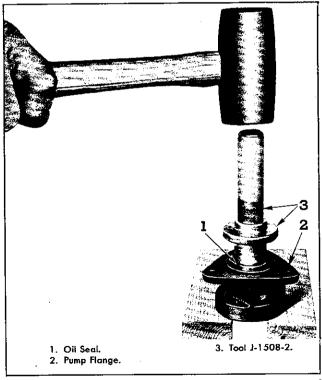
Installing Outer Oil Seal in Fuel Pump Flange with Tool J-1508-2.
